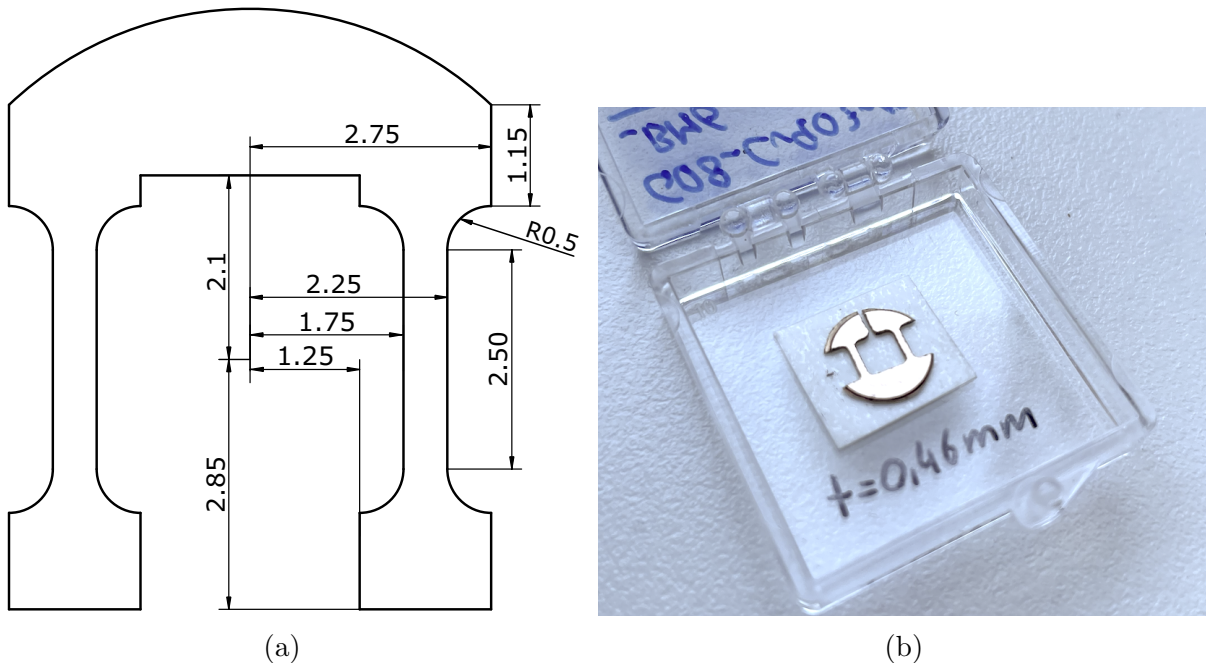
Tensile specimen cut from an HPT-disk: (a) Dimensions of the tensile specimen, (b) specimen after cutting. Dimensions in (a) are given in mm.
